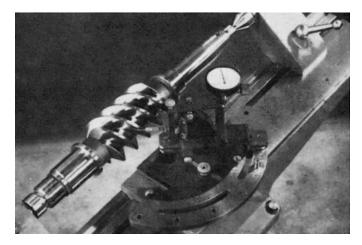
Inspection of tooth form. (Source: Demag Delaval.)
